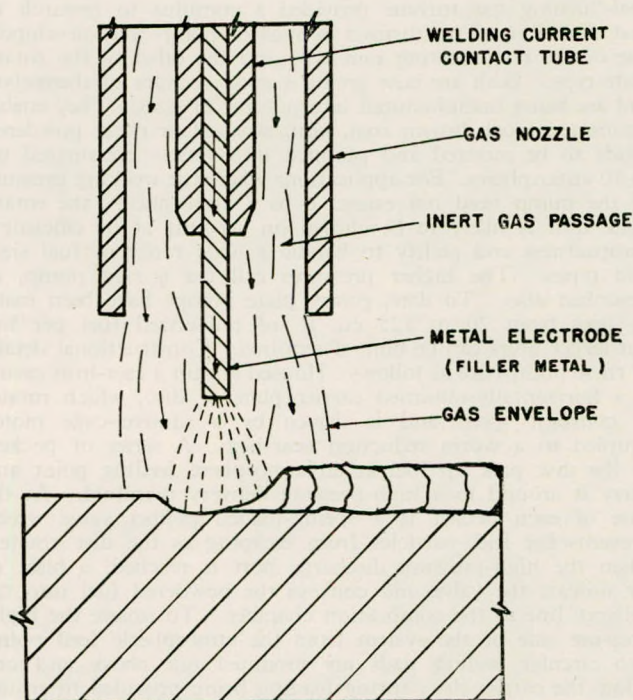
Inert-gas-shielded metal arc welding (consuming type electrode)
